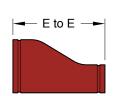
Fabricated Eccentric Reducer (Segment Welded)
